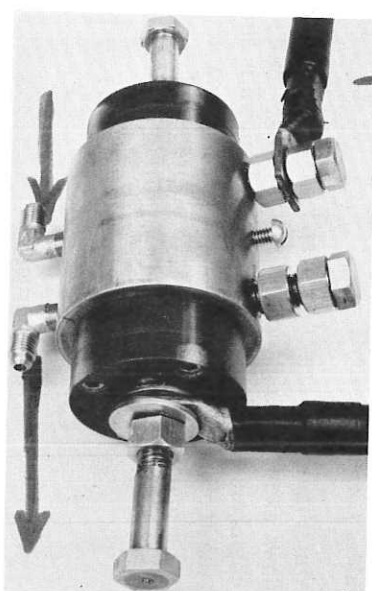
ECM fixture for Krouse fatigue test specimens. The specimen is placed between split electrodes for assembly purposes. During machining a 0.010-in. envelope of material is removed from the test section of the specimen by ECM. (Courtesy of the General Electric Company.)
